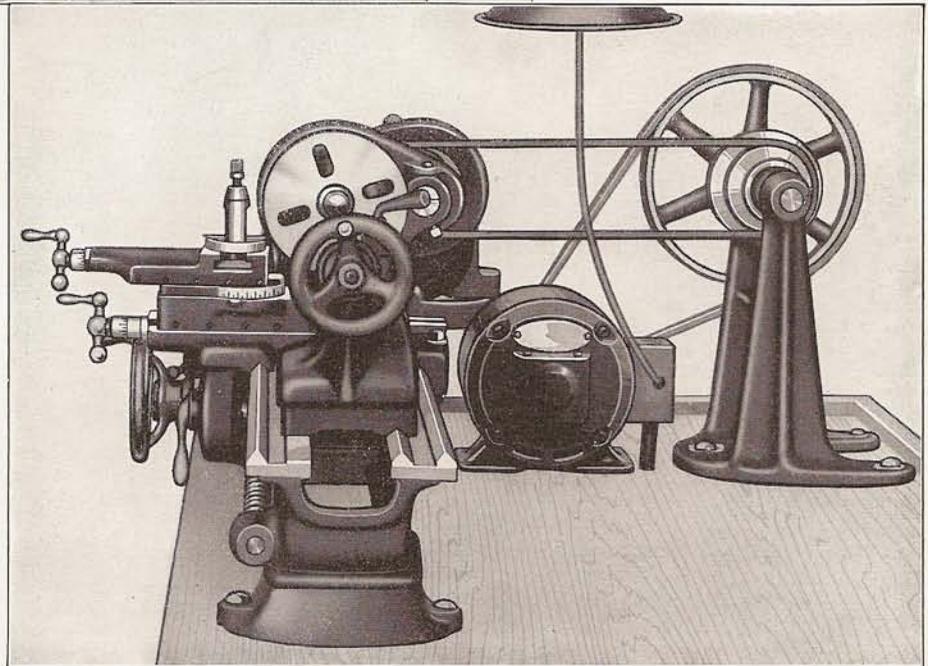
View of 9-inch "Workshop" Motor Driven Lathe from Tailstock end.
